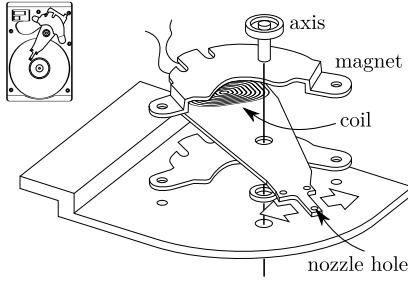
Top view of a hard drive and exploded view of the cut-out base plate, actuator arm, axis, and magnet assembly.
